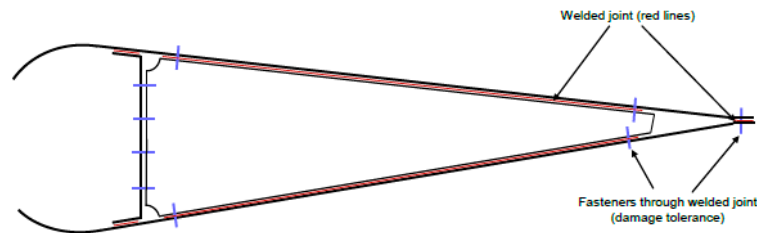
Cross-sectional view of the welded multi-rib rudder concept at a rib position without a hinge bracket.
